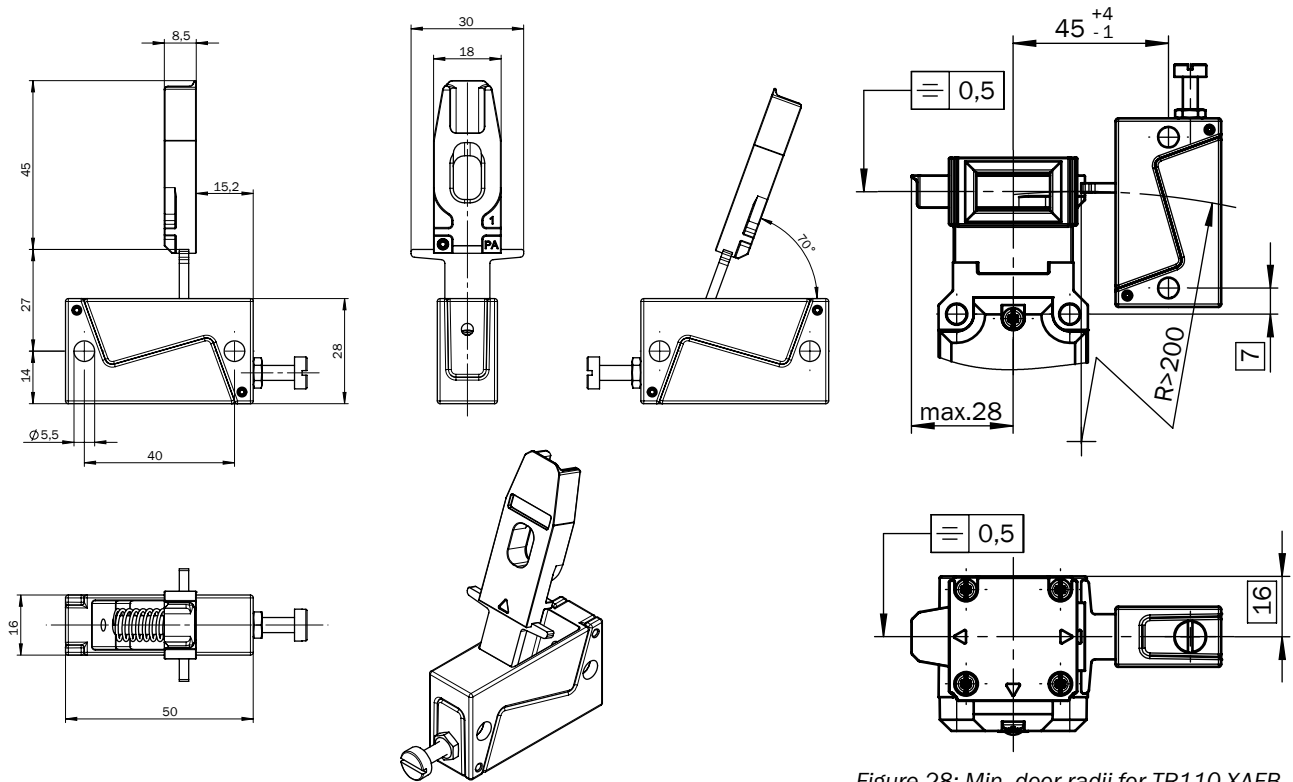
Dimensional drawing of TR110-XAFB hinged actuator (mm)
